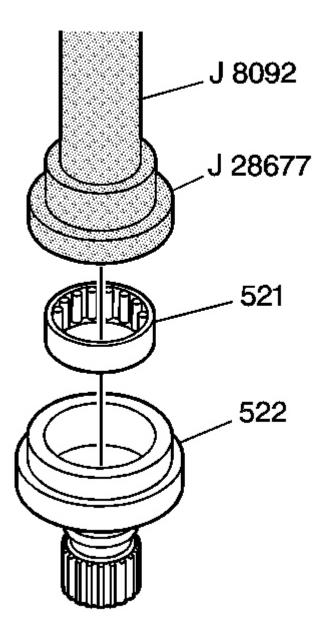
Pressing In Drive Sprocket Support Bearing With J 8092 & J 28677 Courtesy of GENERAL MOTORS CORP.
